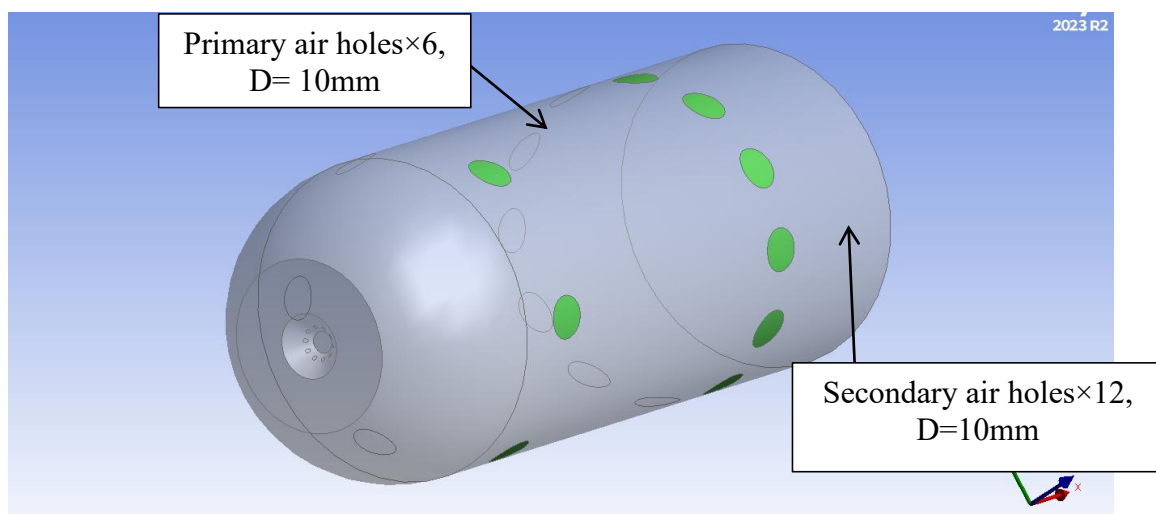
conventional combustor dome and cylinder 3D view, primary and secondary air holes dimensions
